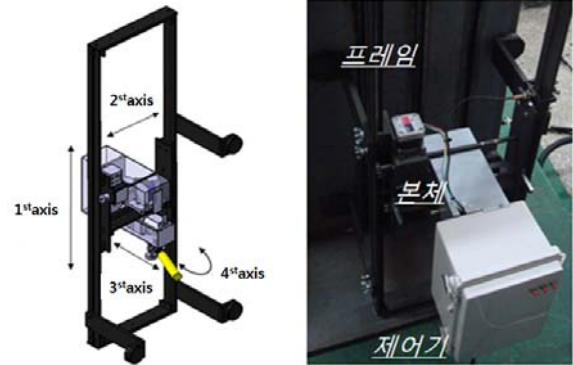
Automatic welding robot (3D-model and Picture)
